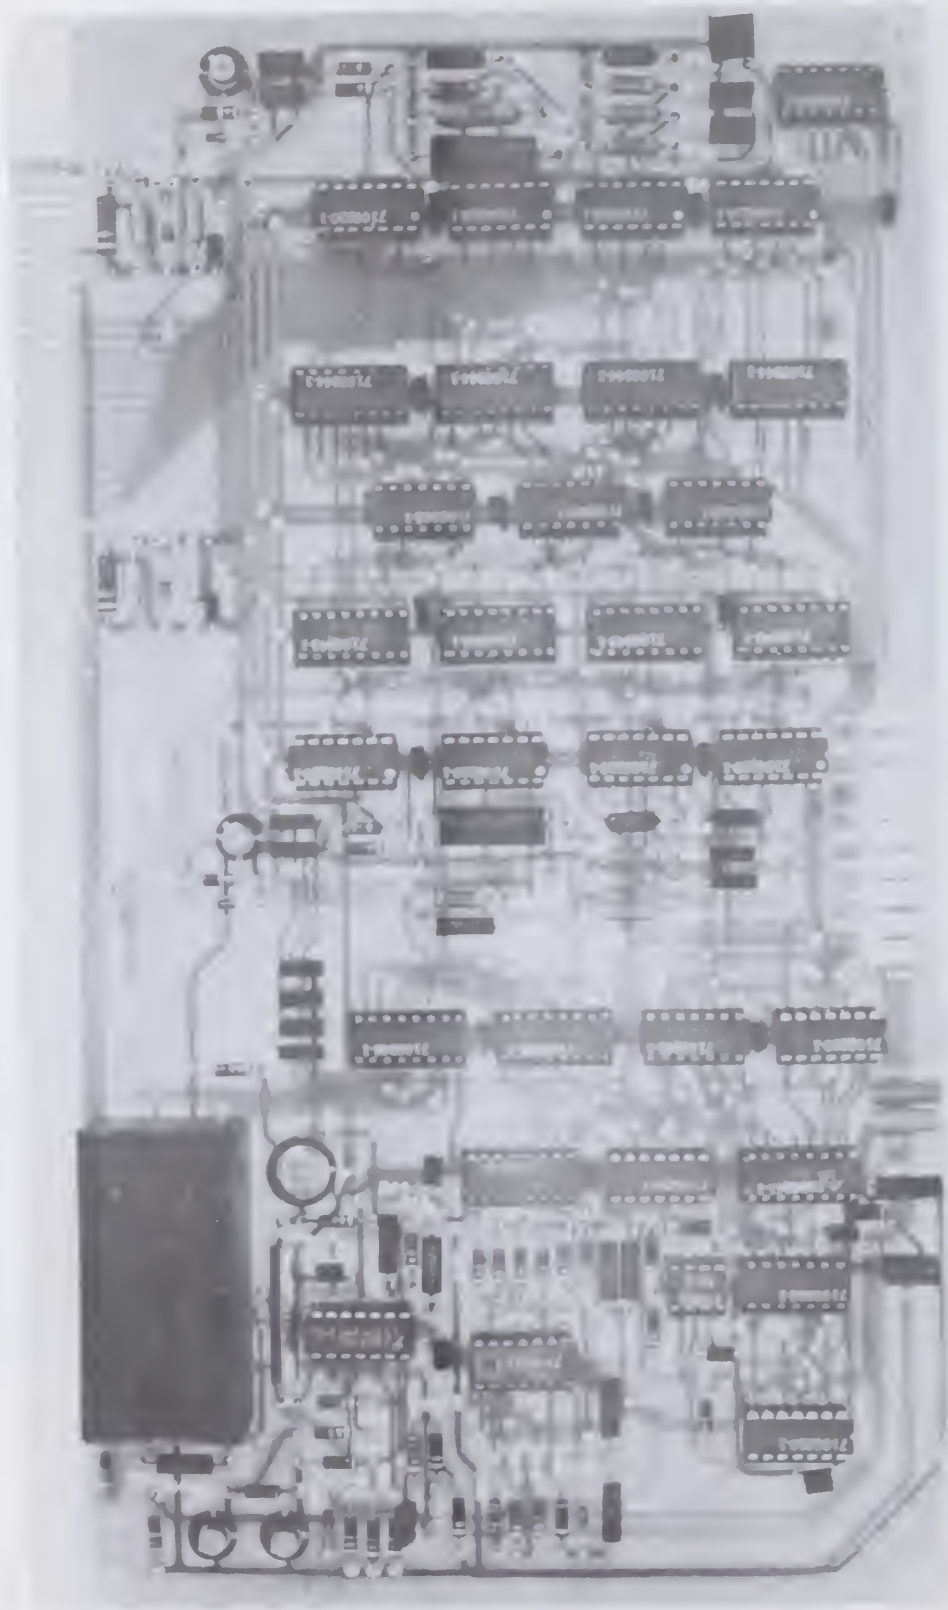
Synchro Converter CCA N1A2A3/A4 — Component and Wiring Side (photo)
